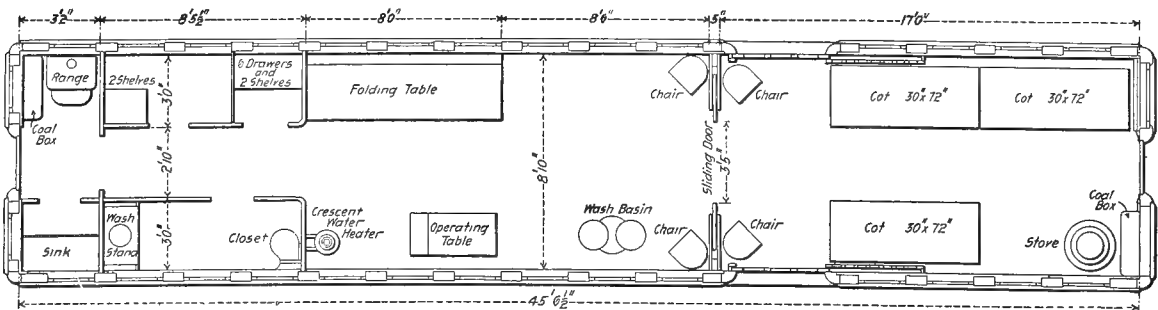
Floor Plan of Lehigh Valley Hospital Car.
